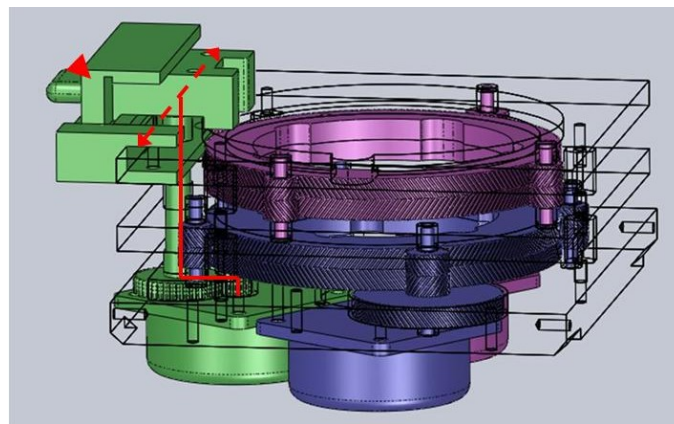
Left hand module design, highlighting catheter bridge deflection lever actuator drivetrain (green parts) and retractable yoke (arrowhead).
